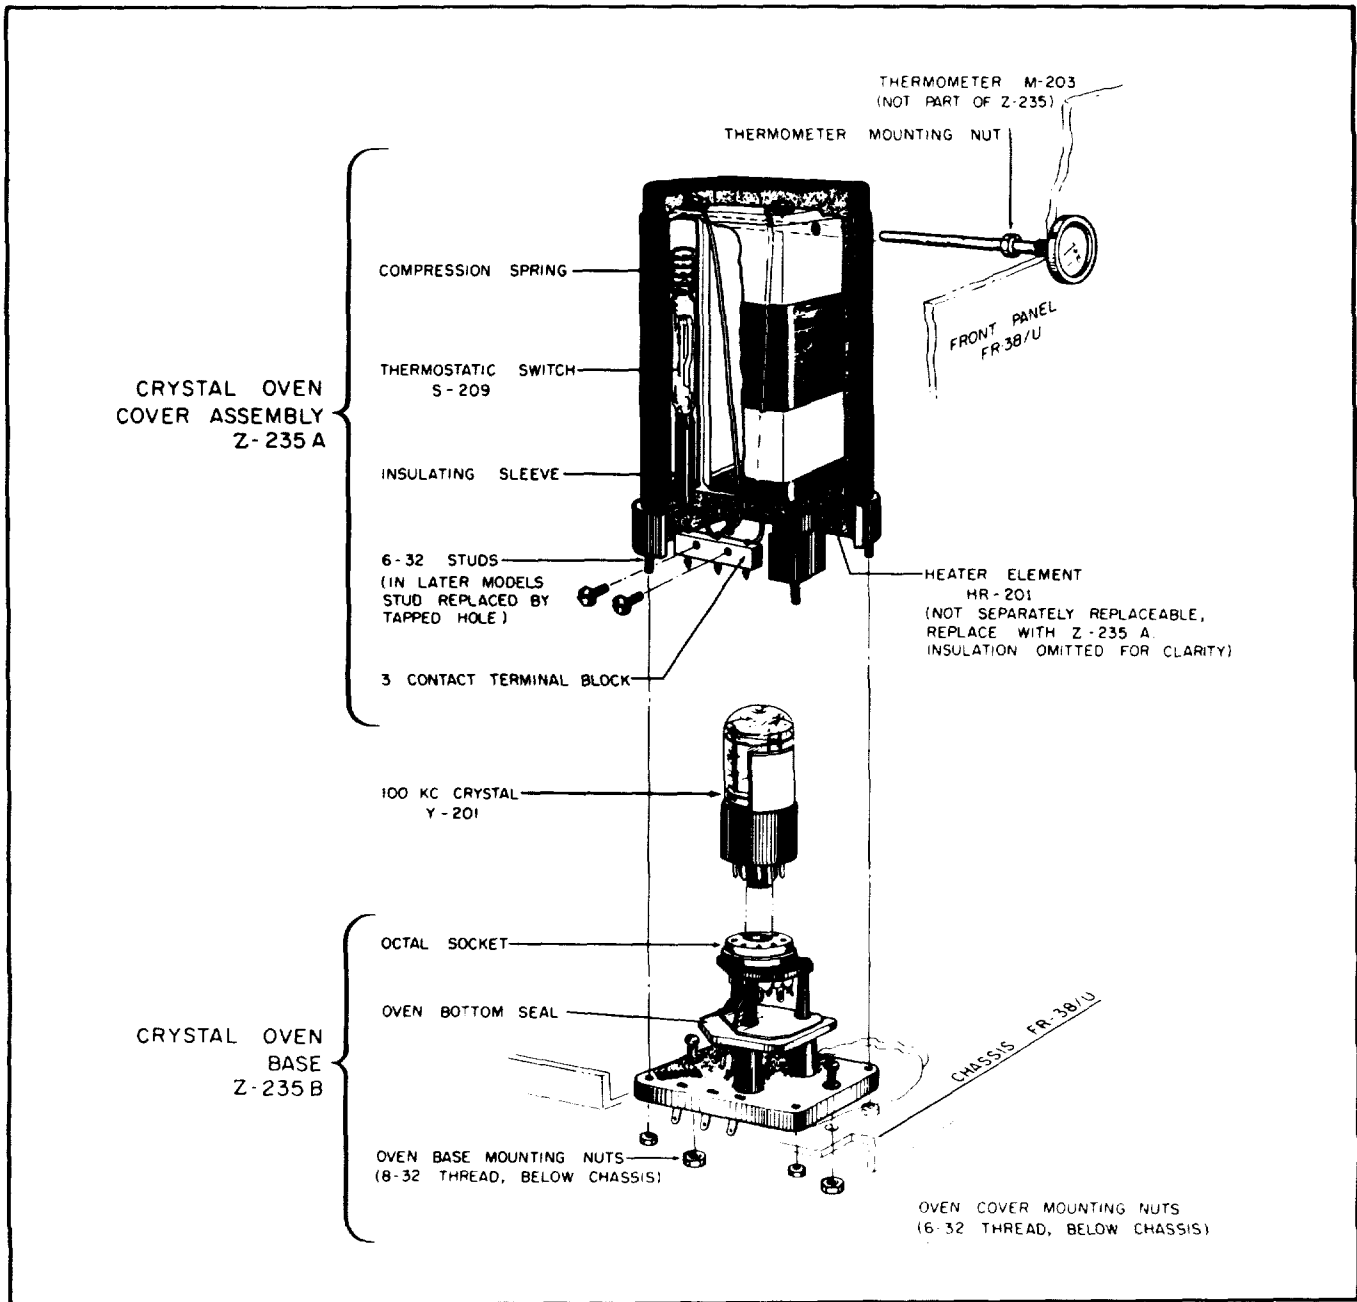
Exploded View of Crystal Oven, FR-38/U only.
